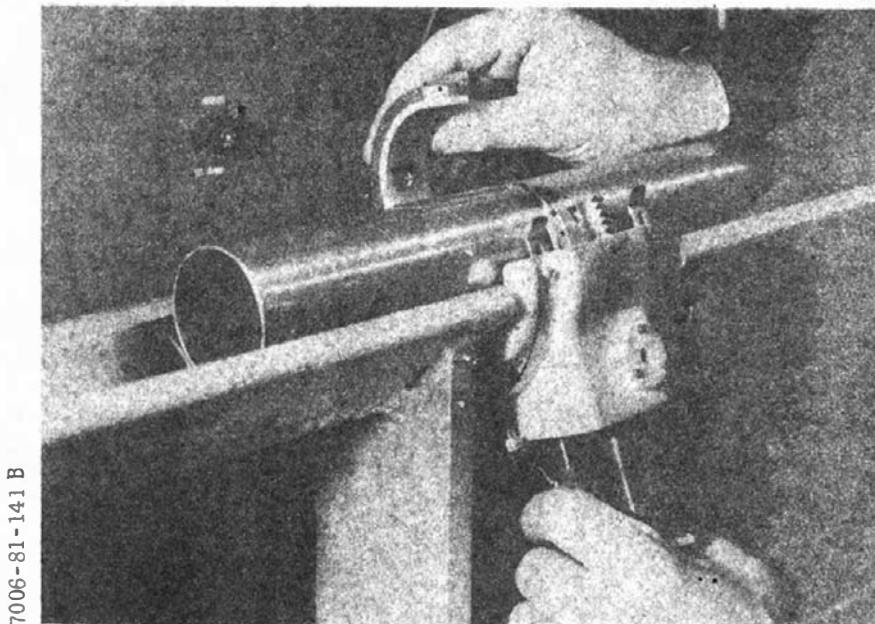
Placing Ring Gear Segments Around Flanged and Tacked Tube Joint
